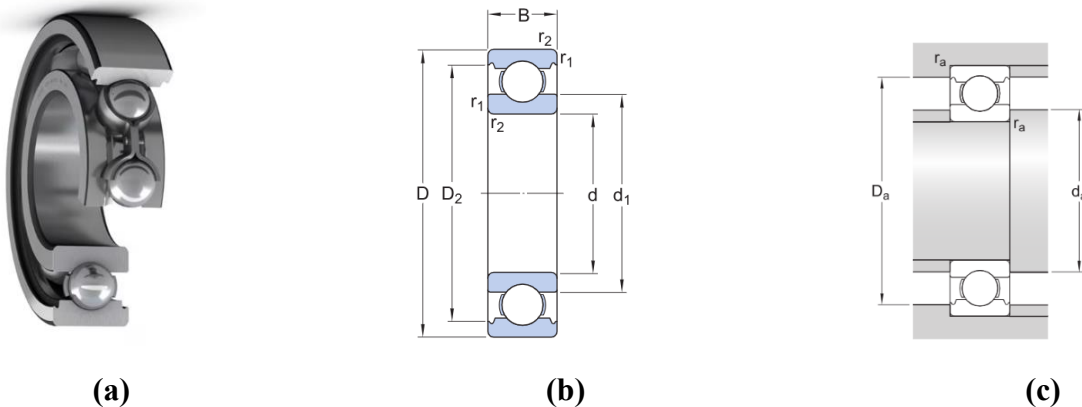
(a) 3D view of Roller bearing (b)&(c) section view with different dimensions [15]
